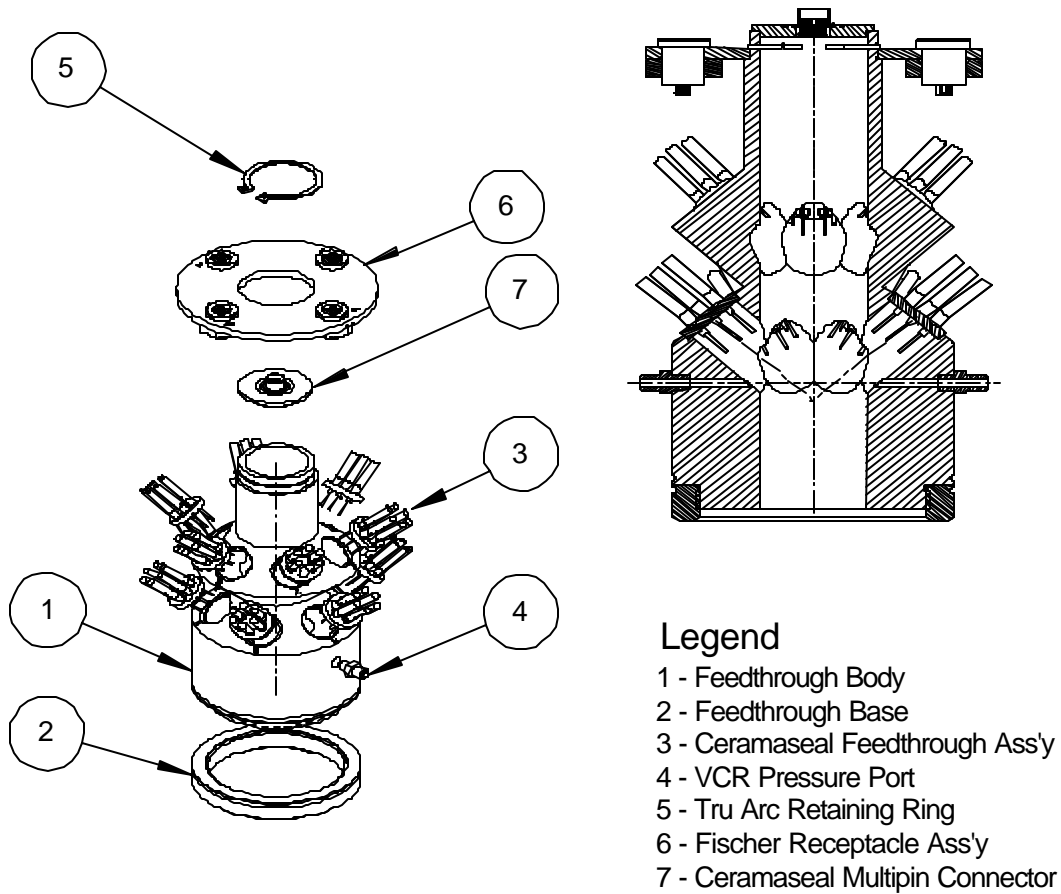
Cross Sectional view of the LQX feedthrough assembly
